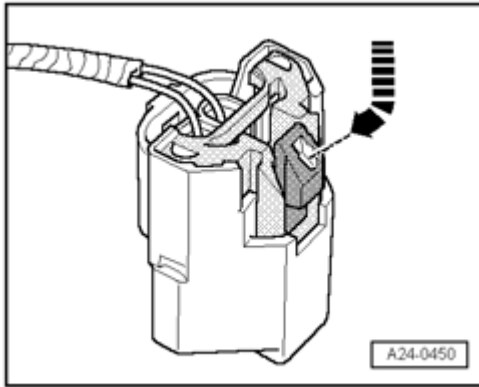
Disconnecting Electrical Connectors For Fuel Injectors By Pressing Retaining Tab
